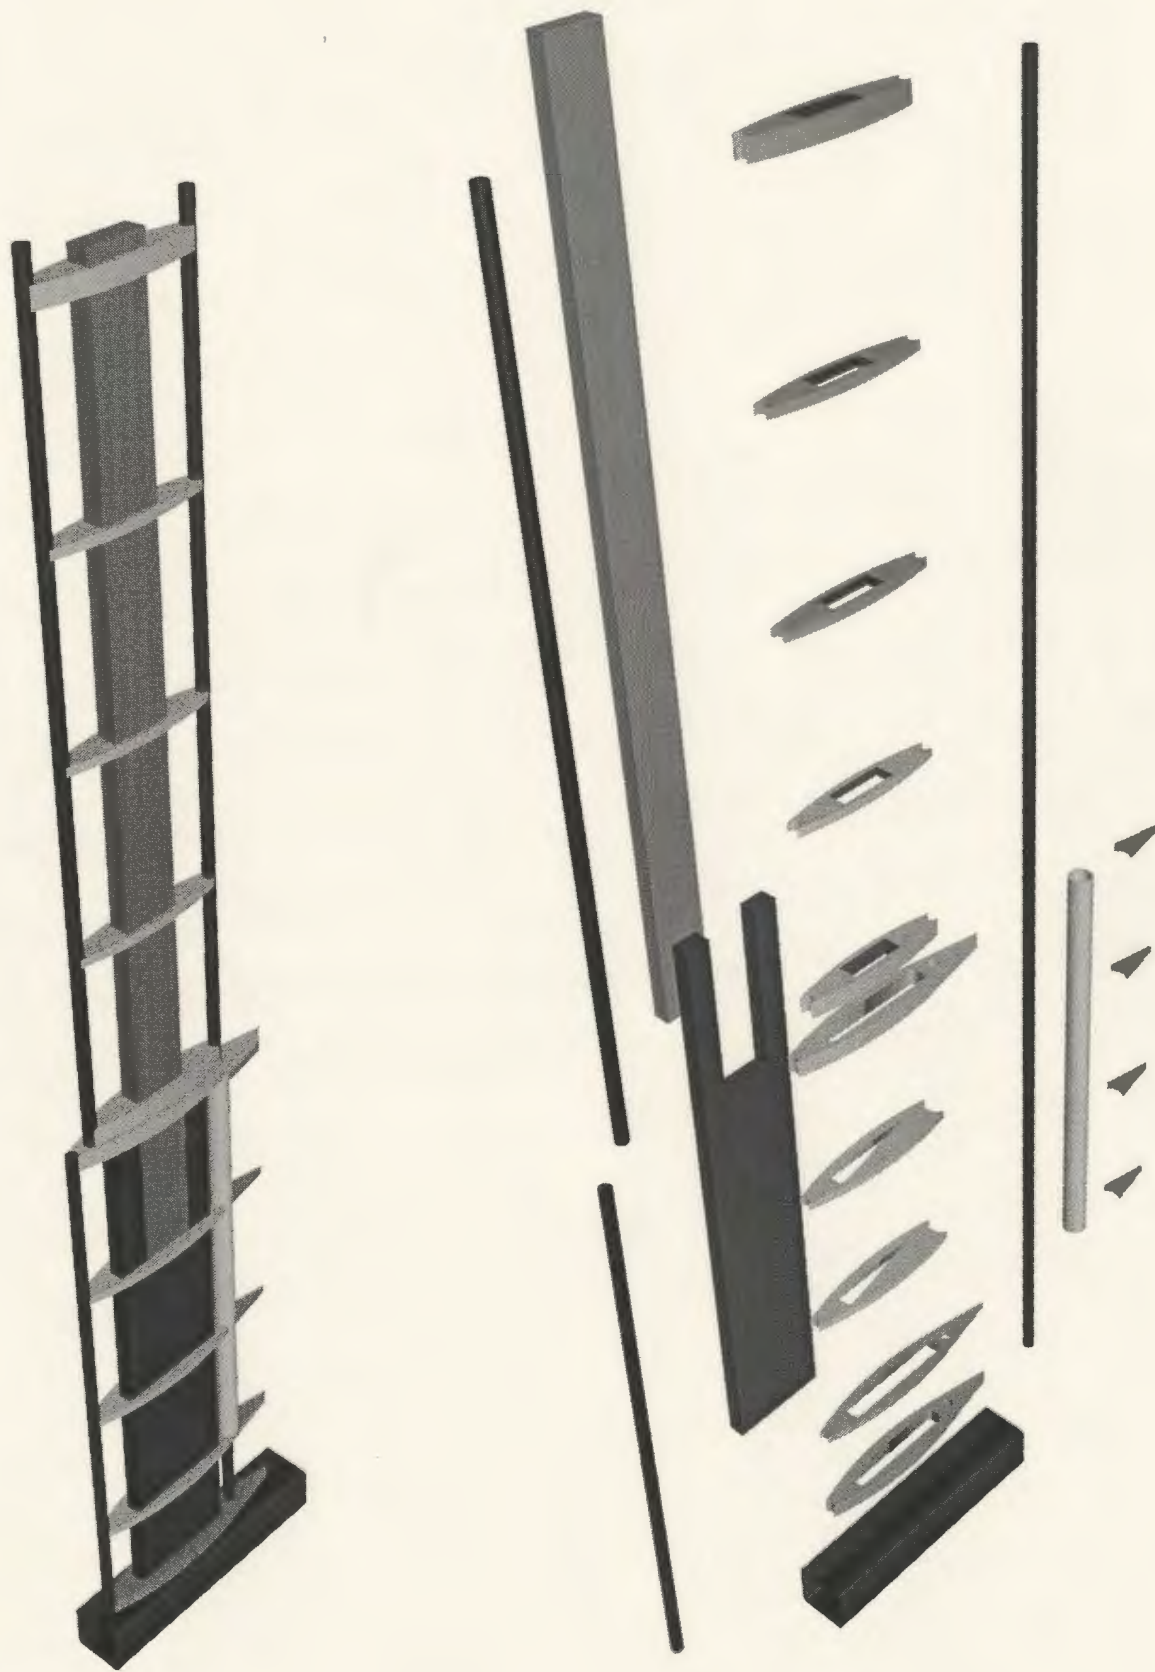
Assembled and Exploded Views of Proposed Mast Frame
